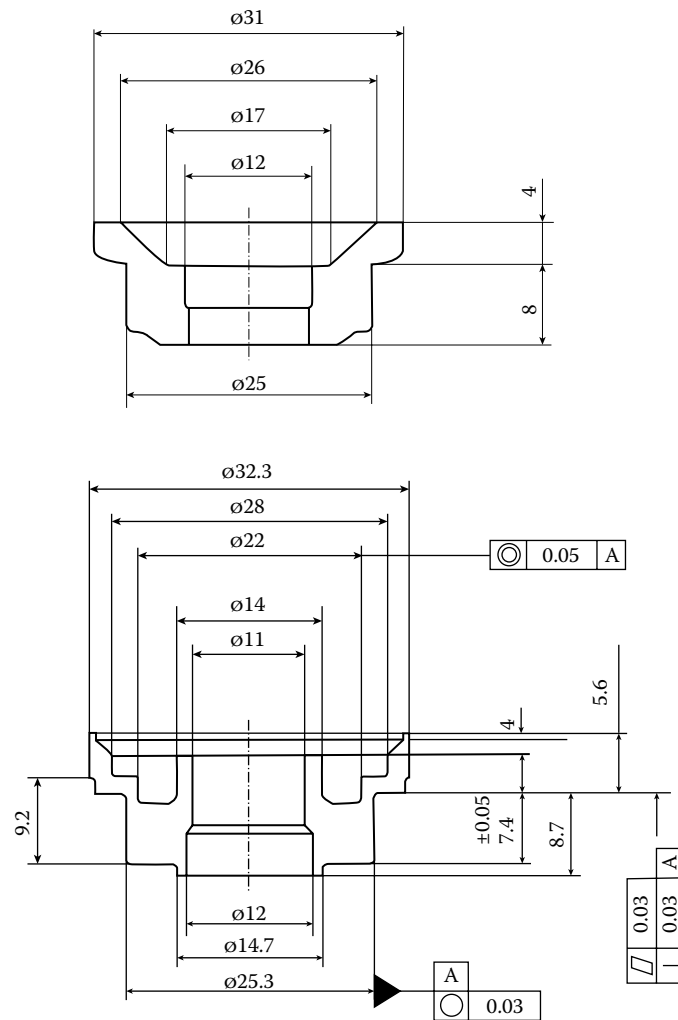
Drawing of hub for personal computer. Top: Pre-forming; Bottom: Drawing for forging
